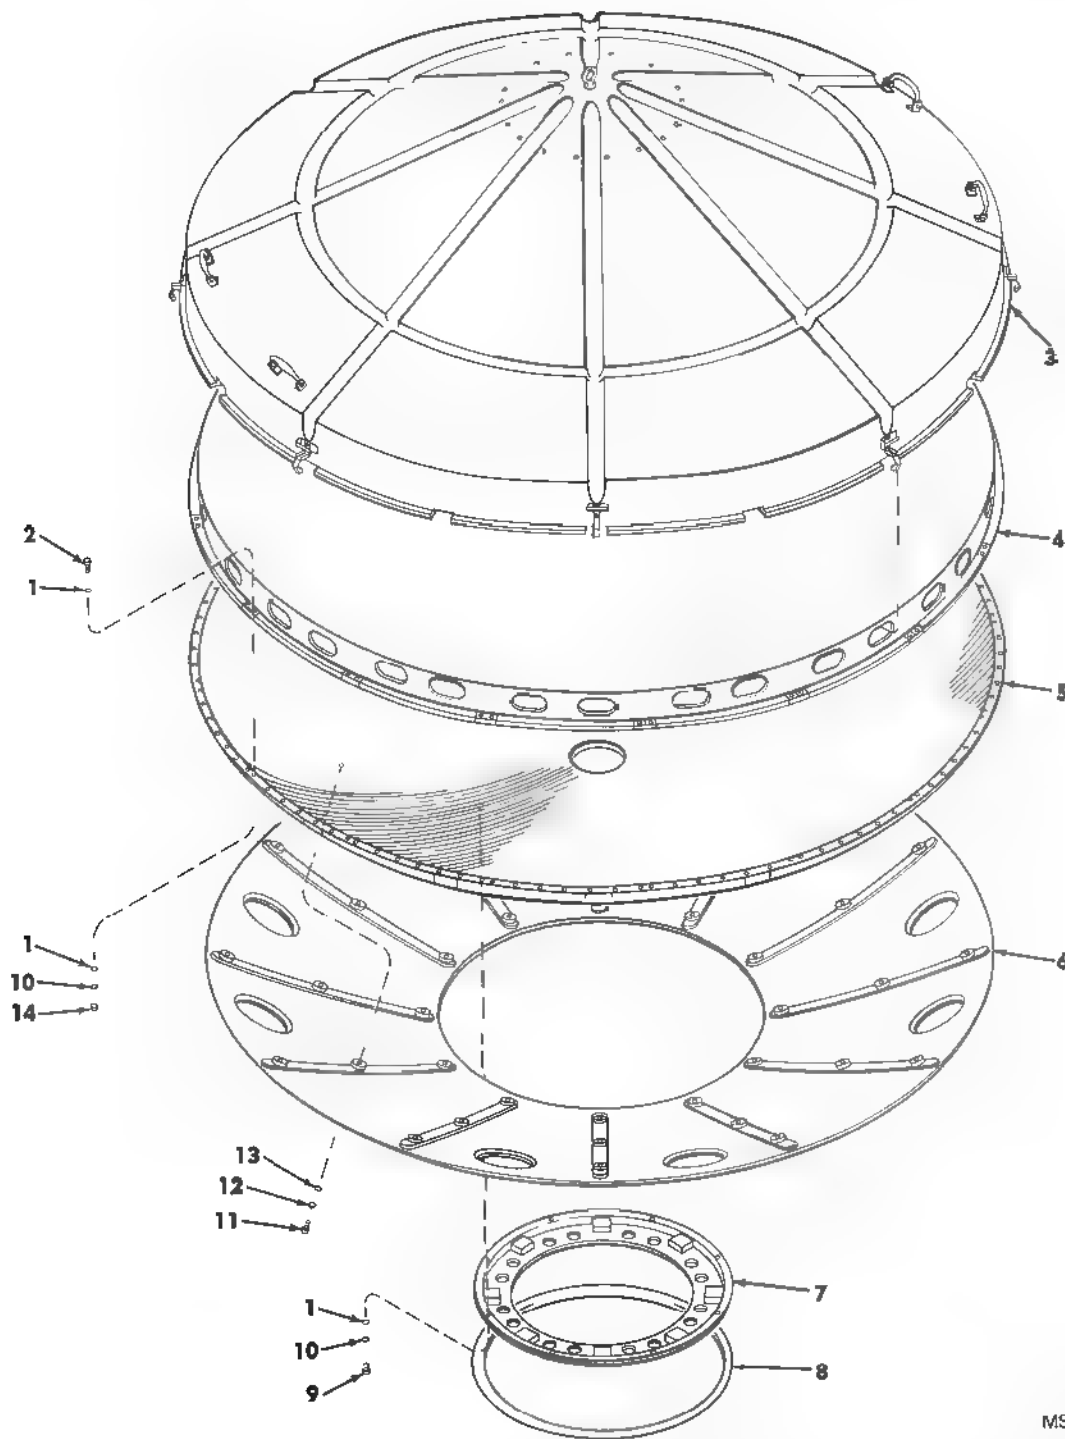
TELESCOPE ASSEMBLY /8511779/-EXPLODED VIEW
